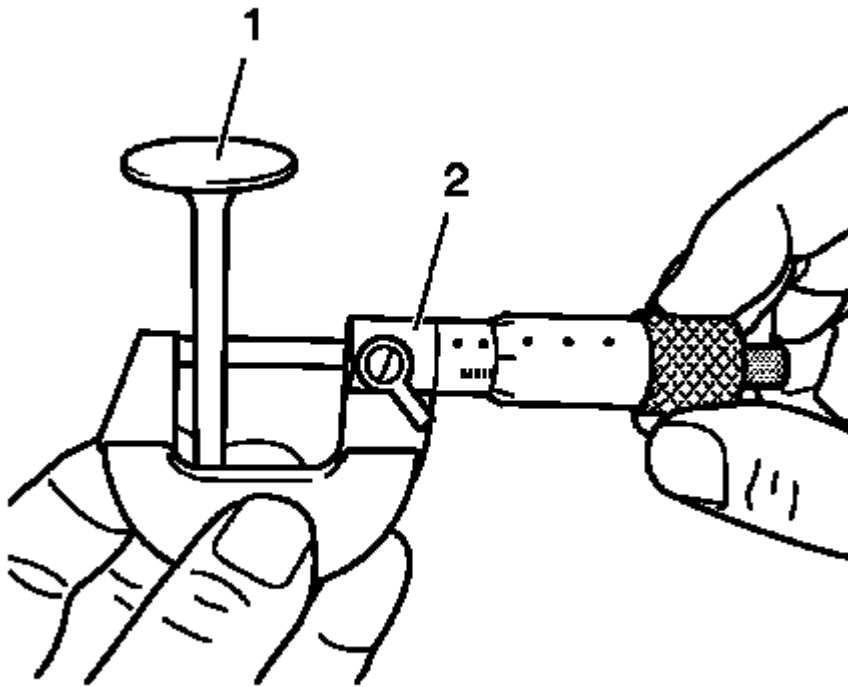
Measuring Valve Stem Diameter Using Micrometer Gauge
